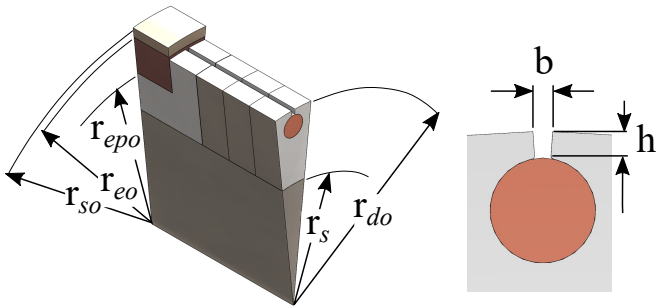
Key nominal dimensions for calculating the stresses in the active part of a thick laminate rotor
